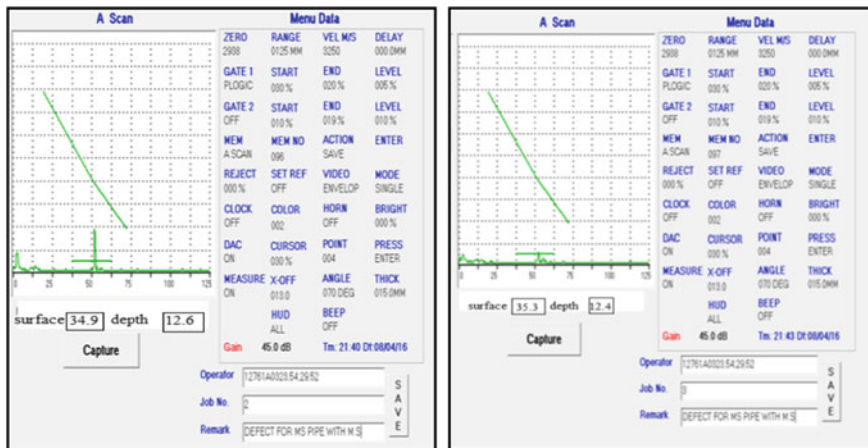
Defect flaw present in mild steel pipe clad with mild steel electrode
